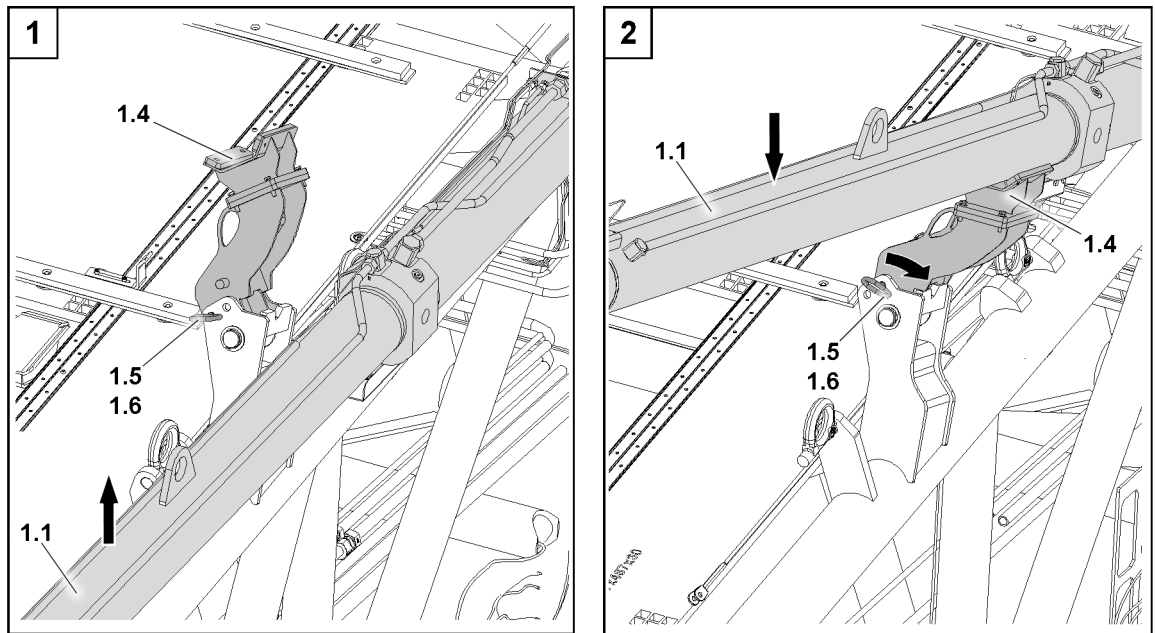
Bringing the D-relapse cylinder into the assembly position
